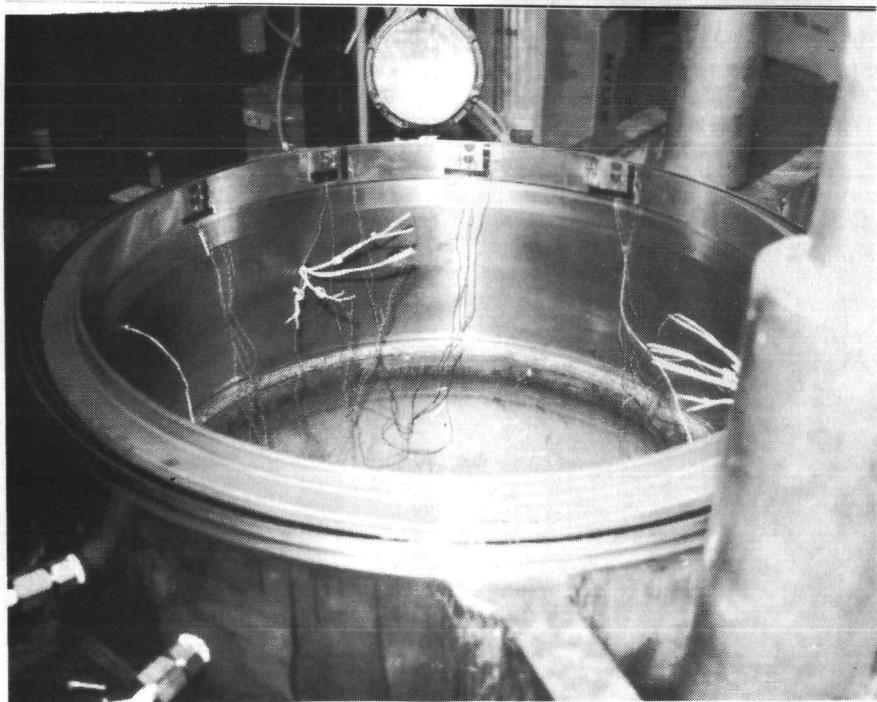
Strain Gaged Ring in Fixture (C79-668)
